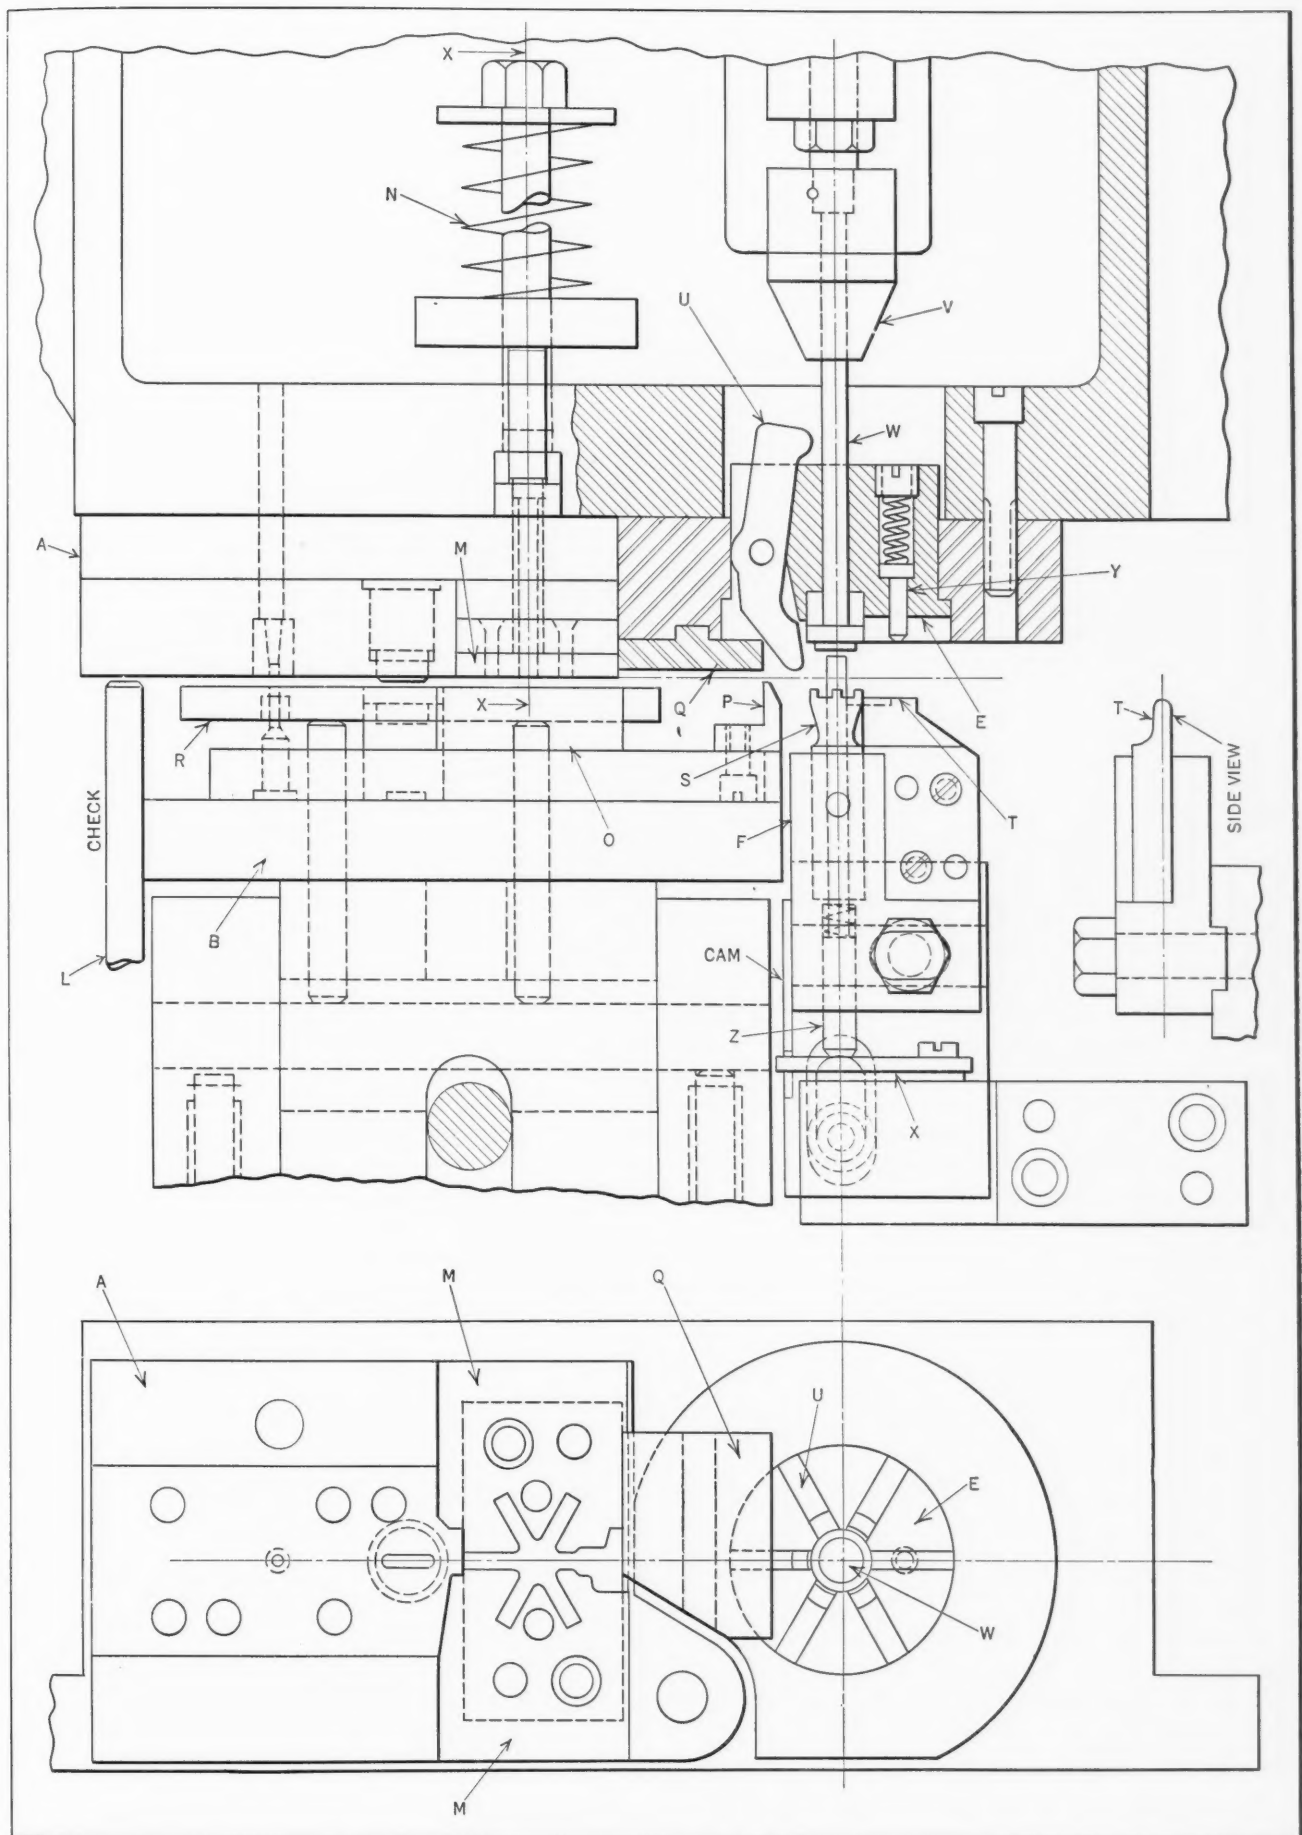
Assembly Views of Die and Forming Tools Shown in Fig. 1
